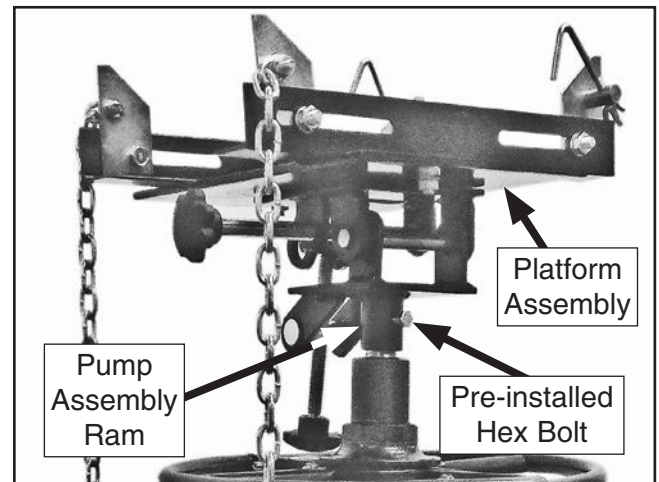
Platform assembly mounted to pump assembly ram (chain mount plates, chains, and anchor bolt shown attached).
